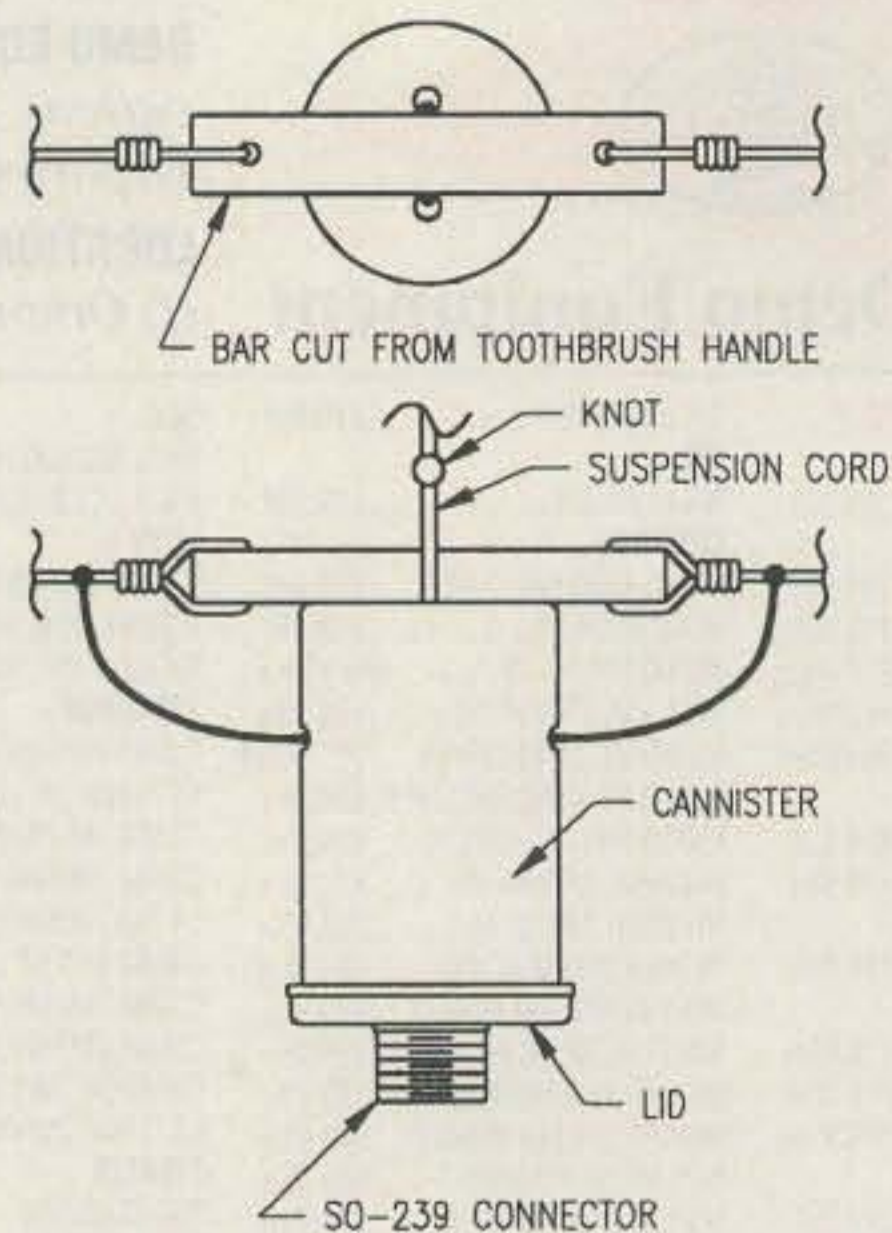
If we add the remnants of an old toothbrush to a film container, we have the makings of a center support system for a dipole antenna.
